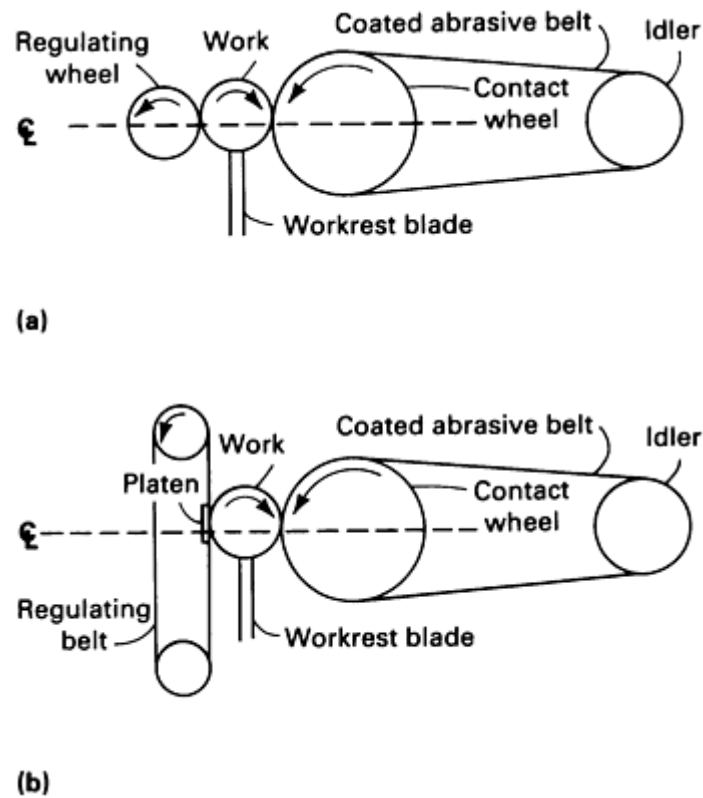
Schematic of two different coated abrasive centerless grinding setups. (a) Abrasive belt centerless grinder with regulating wheel. (b) Abrasive belt centerless grinder with regulating belt
